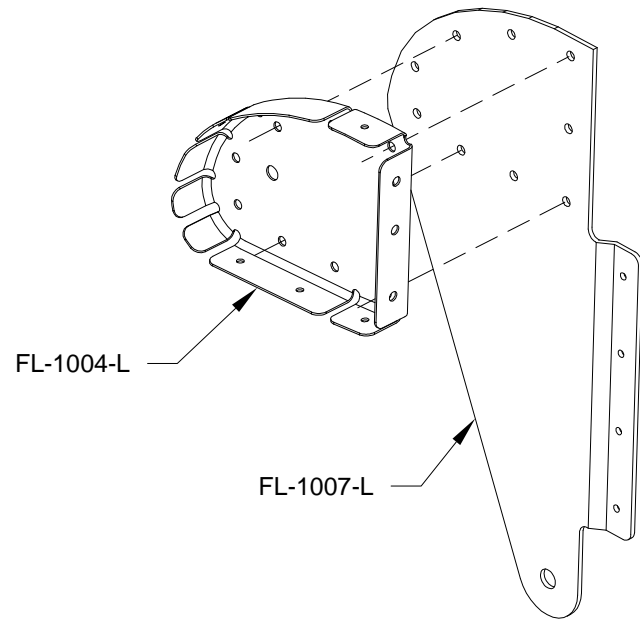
LEFT HINGE PAIR RIB SUBASSEMBLY
